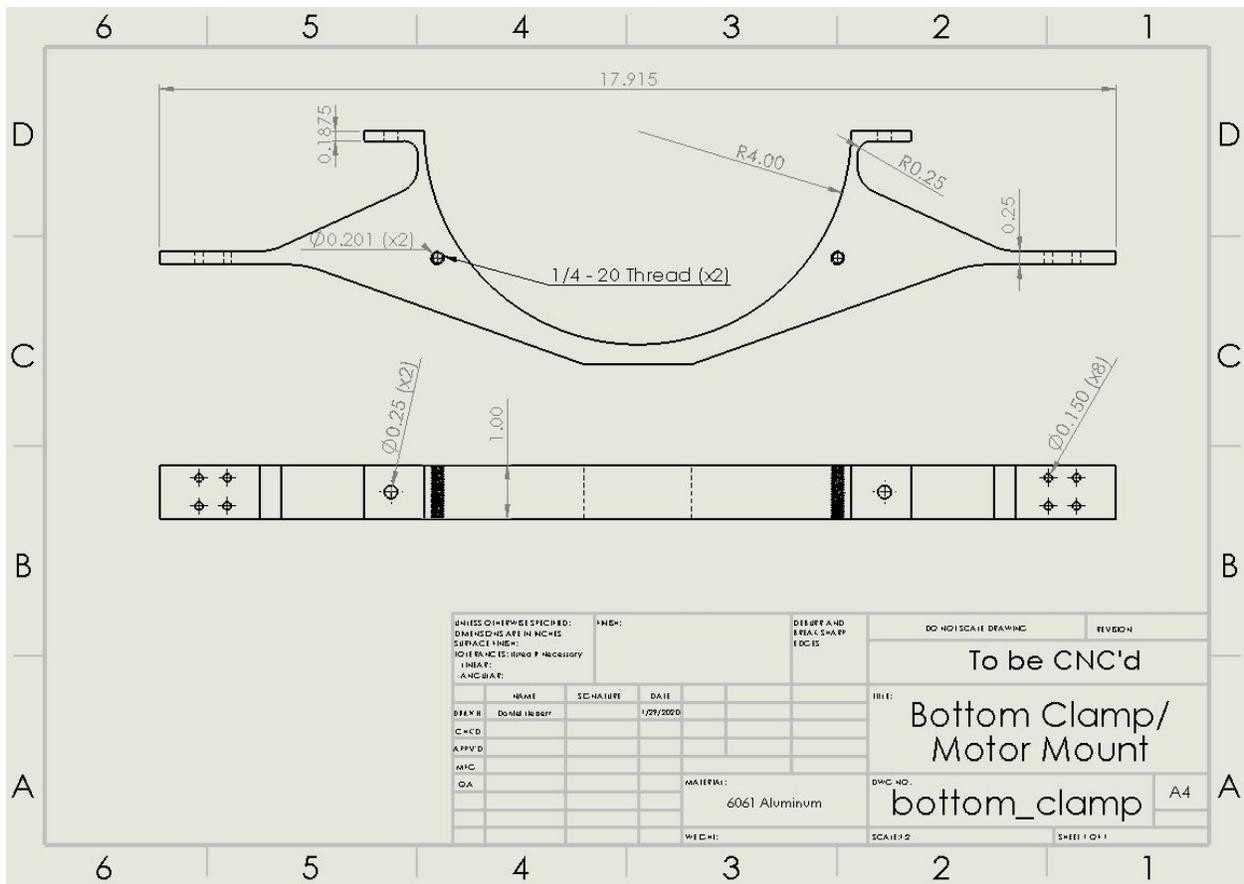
Bottom Clamp/Horizontal Motor Mount Drawing
